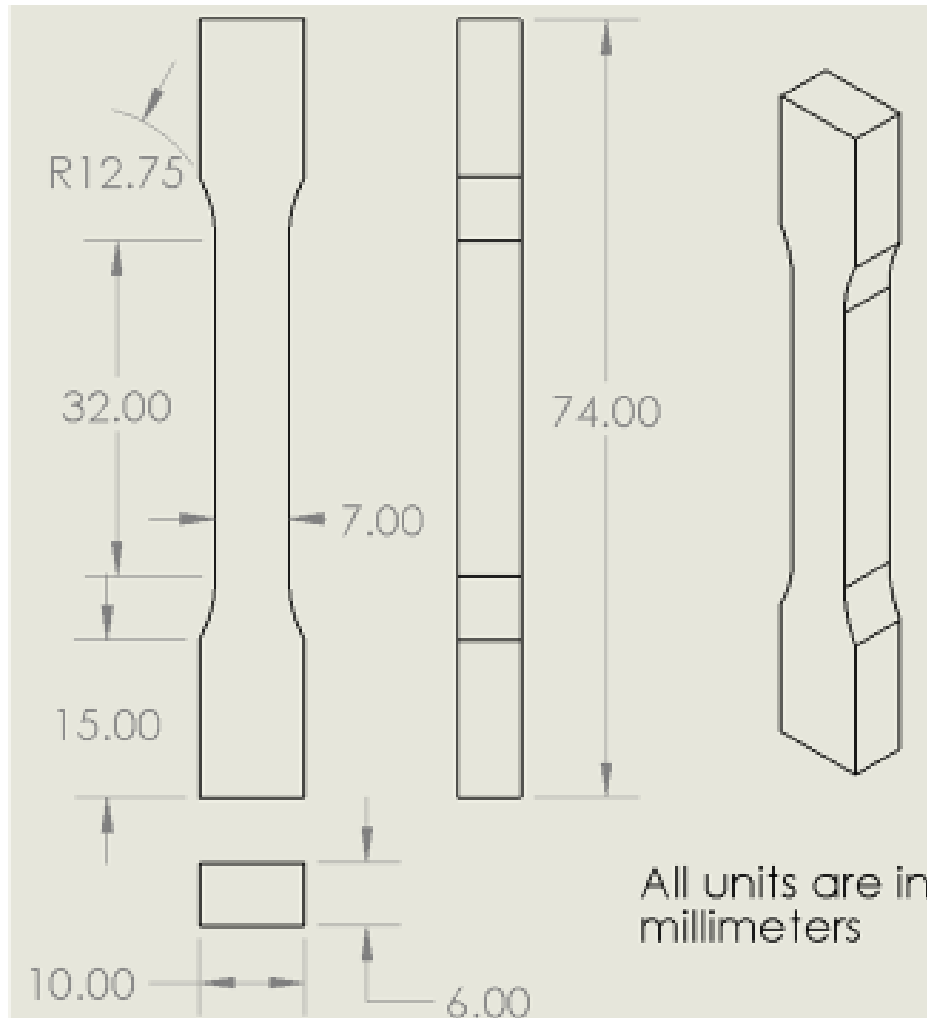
As-printed tension specimen dimensions. Specimen dimensions shall conform to ASTM E8 [12] subsize after machining.
